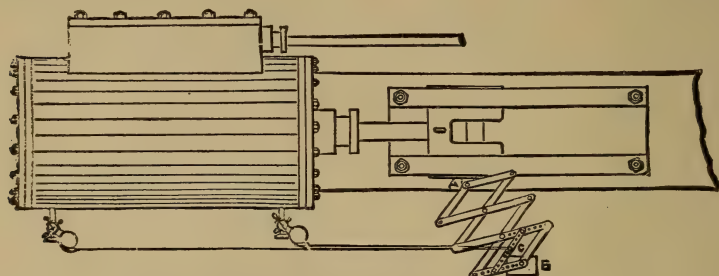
METHOD OF ATTACHING THE PANTOGRAPH.
